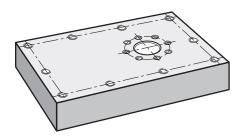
Example workpiece - programming a bolt hole circle and a row of holes
